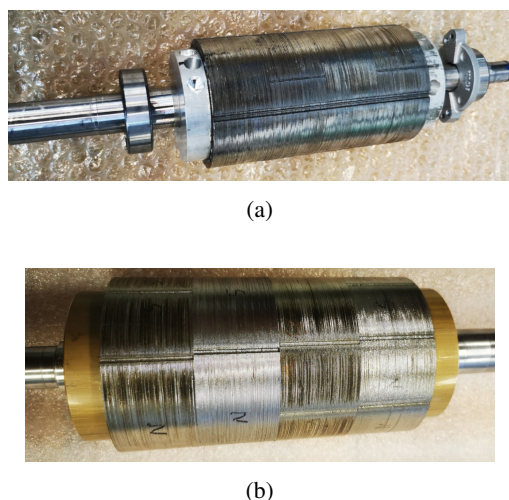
Rotor with laminated magnetic core with un-skewed magnets, comprising version I (IPM I) (a), and with skewed magnets, comprising version II (IPM II) (b)
